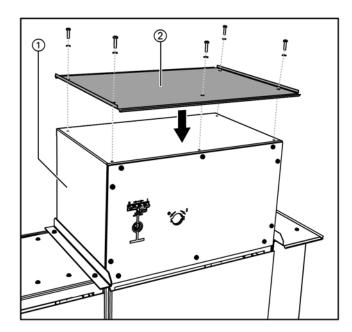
Example: Mounting the protection plate on the roof plate of the busbar earthing switch (basic scheme)
